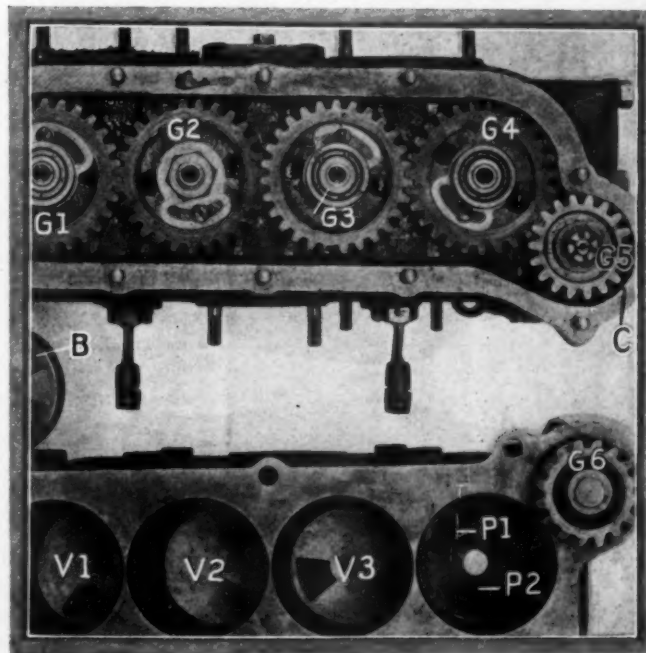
Depicting the valve motion looking through the open ends of the cylinders, showing the valves and ports (B), presenting one of the rotary valves (C), showing the train of gears used to drive the rotary valves
